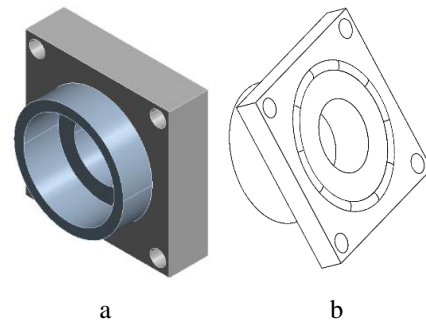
a) Isometric view of the computational 3D model; b) the weld split into divisions for transient conditions
